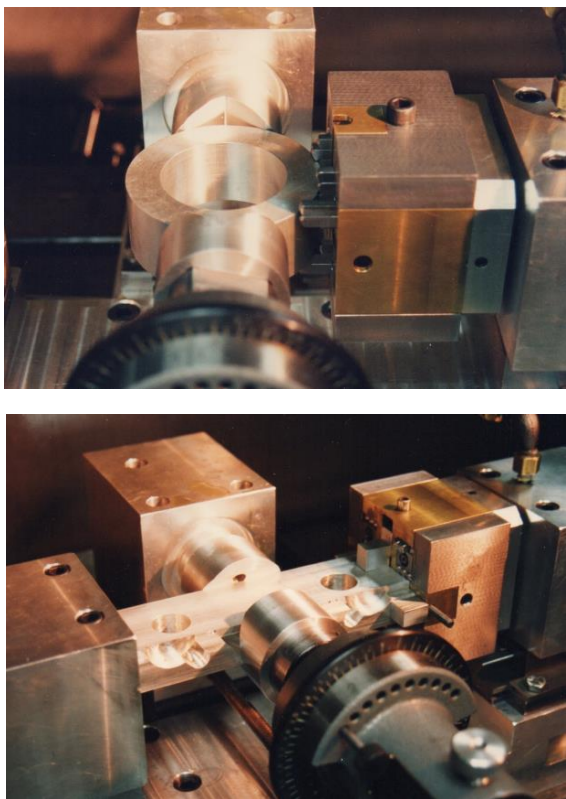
A test prototype of the Dual-Dexterous-Vises system demonstrating holding flexibility. Only one jaw has full features for demonstration purpose. (Top) Conformable plungers on the fully-functional jaw hold a part with curved surfaces with two other jaws. (Bottom) Small hold-down clamps hold a prismatic bar-shaped part with three other jaws.
